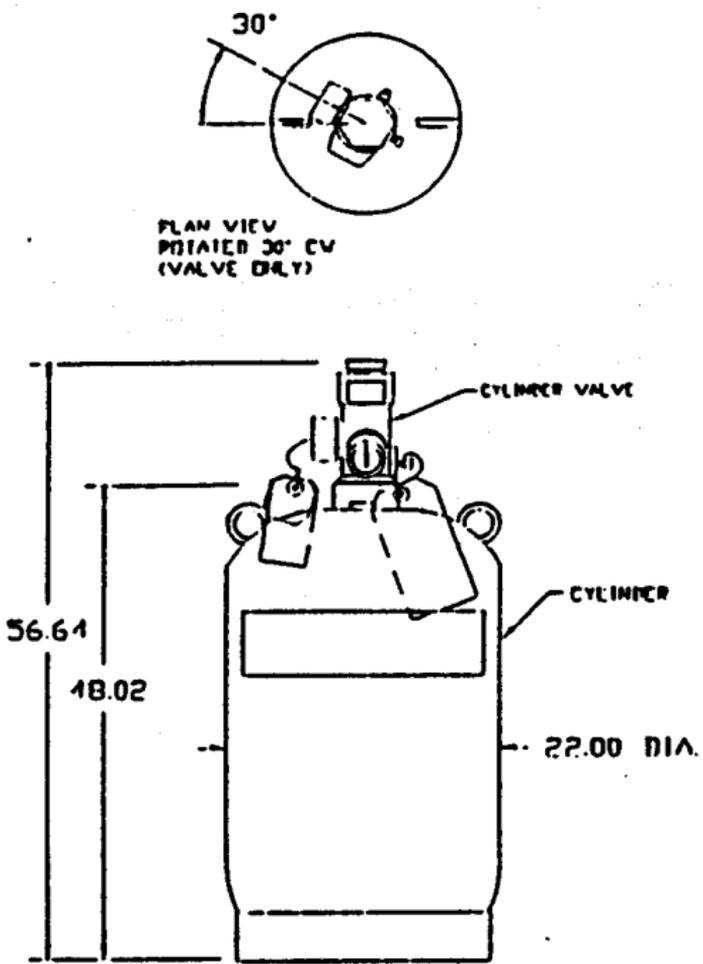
Halon 1301 Cylinder/Valve Assembly, 200 lb., Vertical Mount
